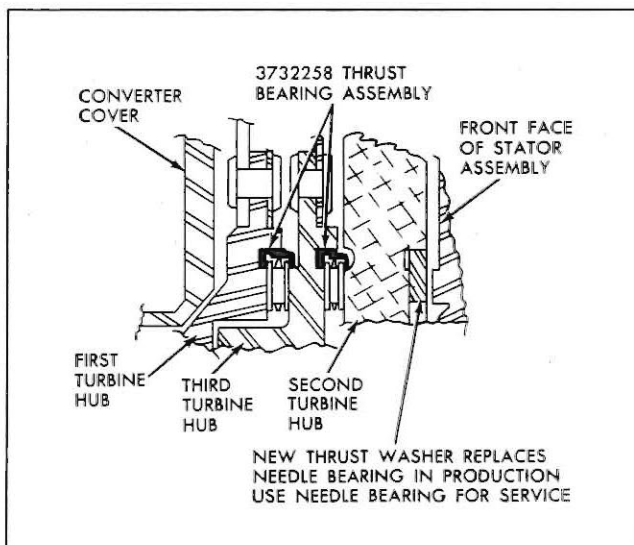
New Design 2nd Turbine Thrust Washer—Turboglide
